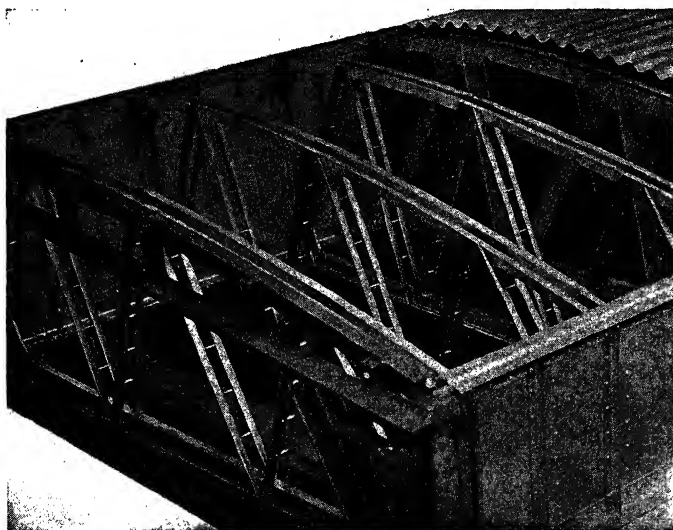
Riveted wing construction. (Courtesy of Glenn L. Martin Company.)
